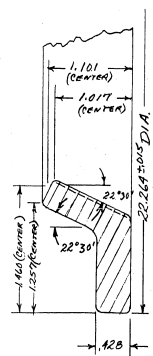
P/N 227596 - Front Flange, Turbine Stator Blade Support Assembly, Material - Ti-110-AT
